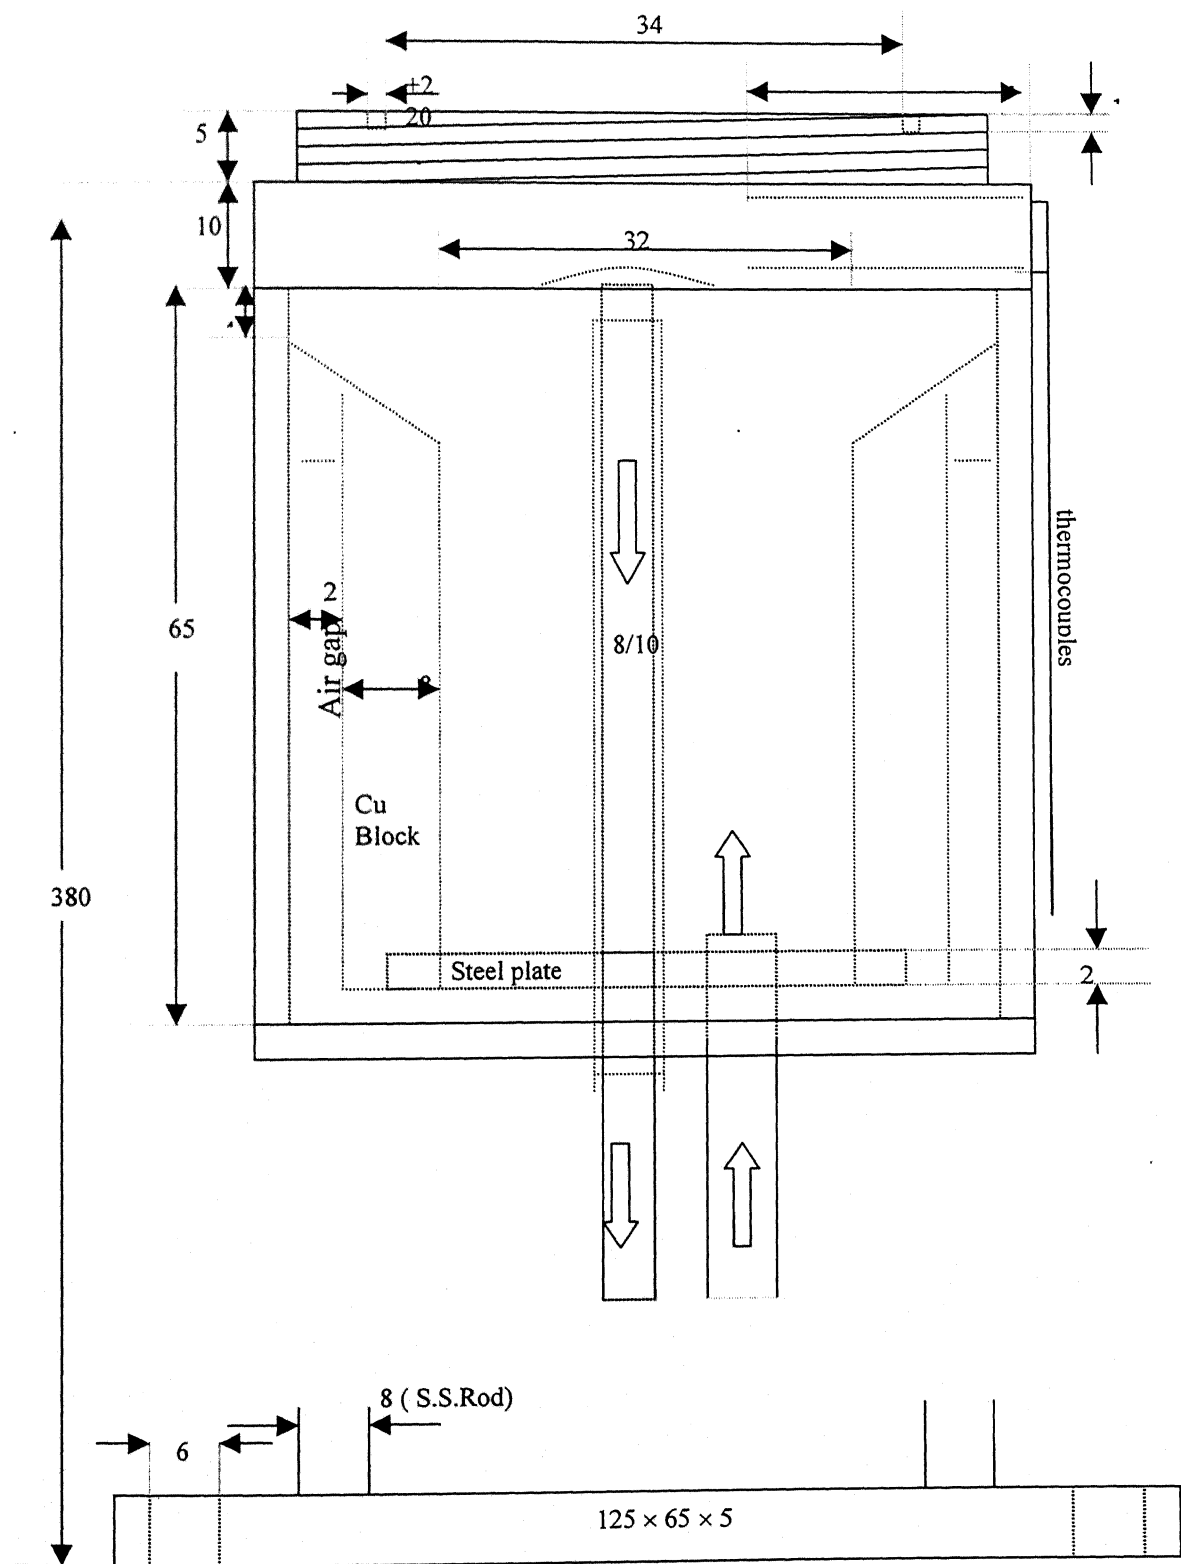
Design of cooling jacket; dimensions in millimeter.
